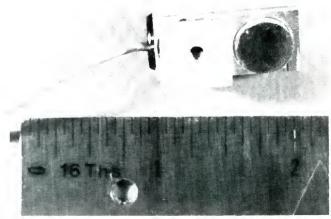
Machined aluminum case with one side flattened, and two holes drilled into it. One hole holds the element and the other the FET amplifier.
